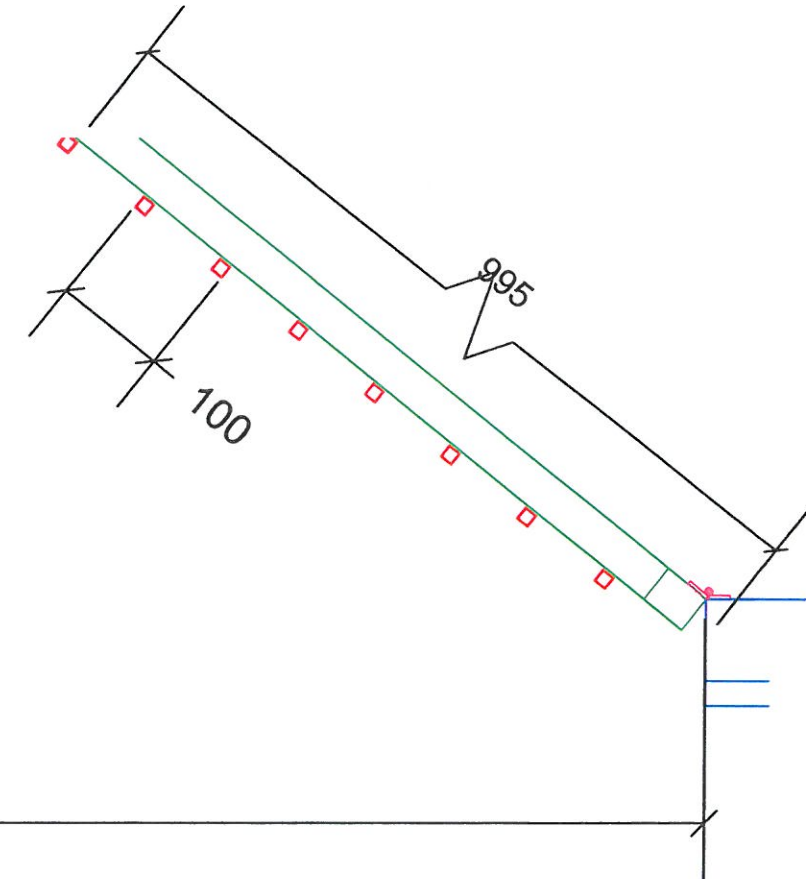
2. Fillet Weld securing a Hollow Rectangular steel Bar.
